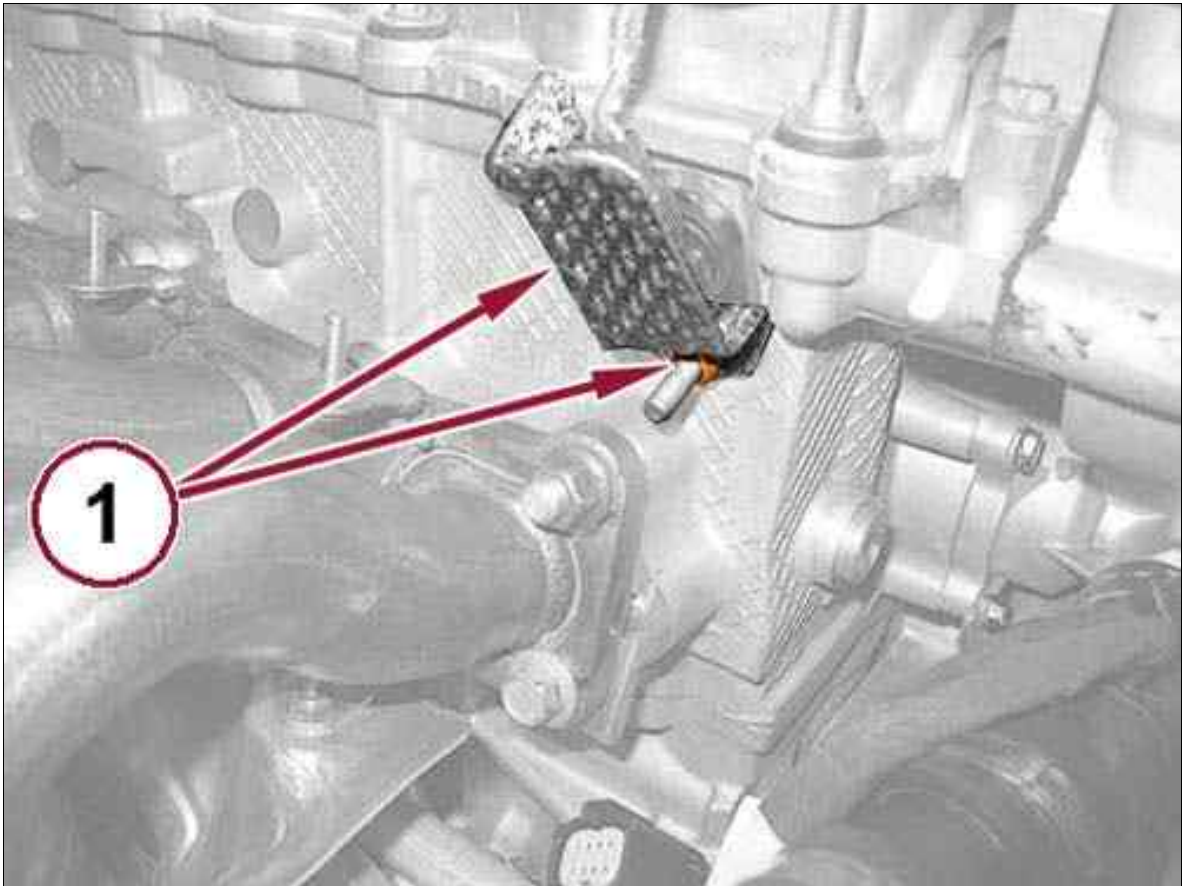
Engine Lifting Bracket & Exhaust Manifold Nut
